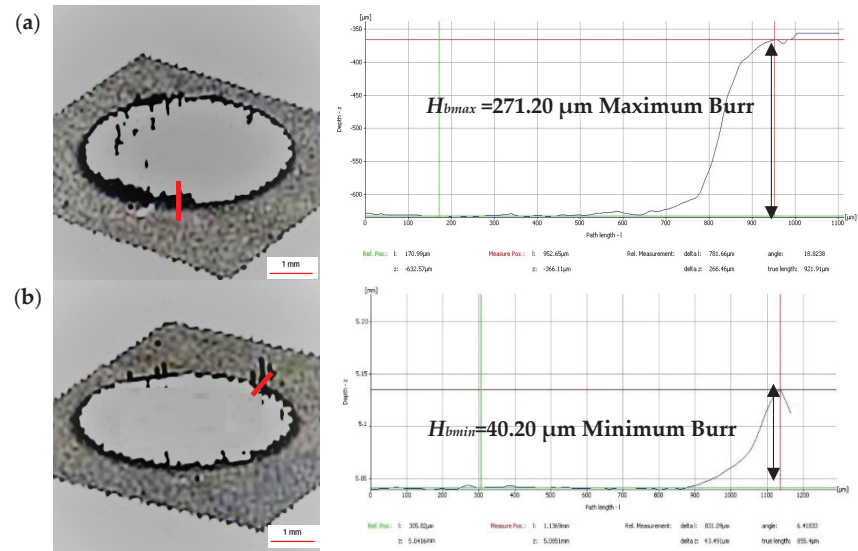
(a) Maximum and (b) minimum burr formation measurements.
